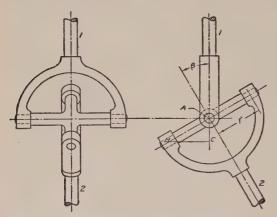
Intersecting Shafts Connected by a Single Universal Joint.
